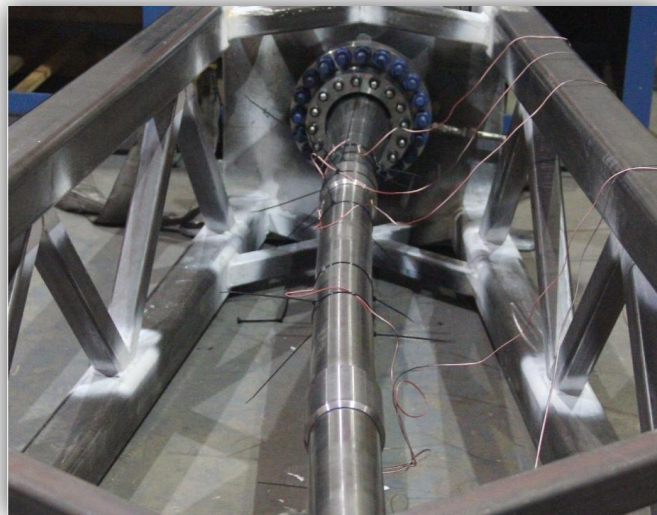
Stage 3 bending of prototype. Max bending at 139,7mm (5,5 inches)
